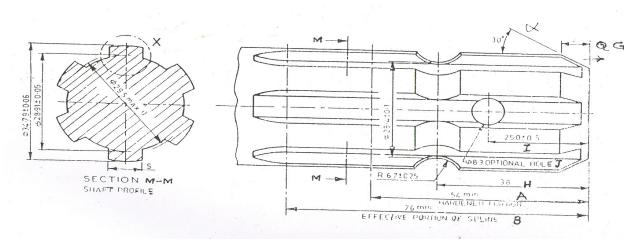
Dimensions of Rotavator Power Input Shaft, mm
